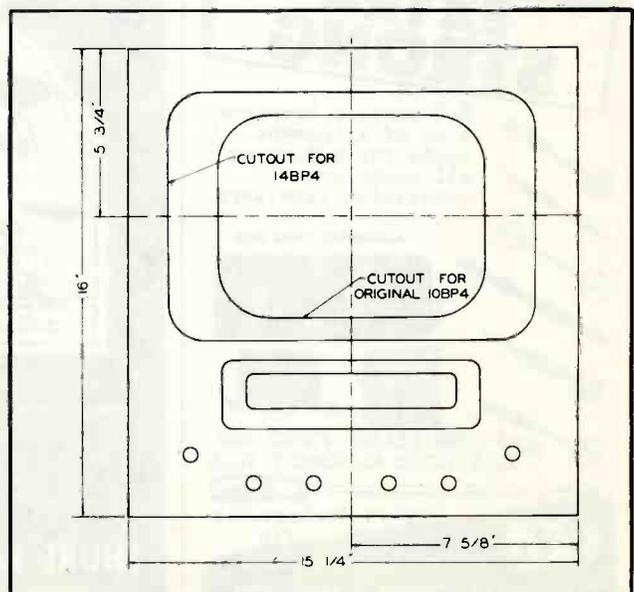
Dimensions of Panel Cutout for 14" Tube.
